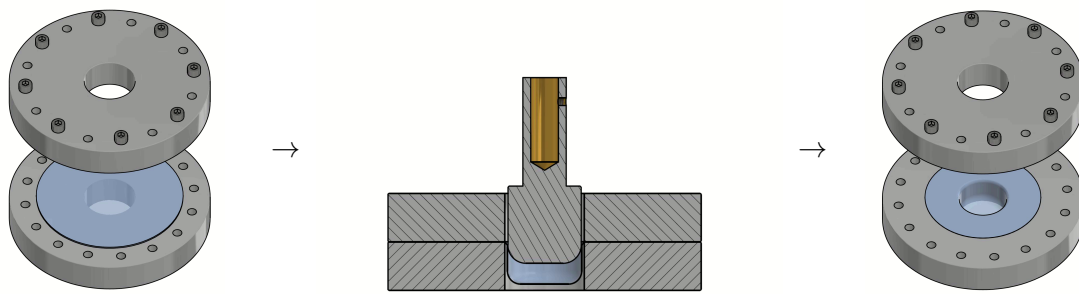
Schematics of the end cap molding process. The Mylar foil is placed in the mold and brought to the oven (left). The hot mold with the Mylar foil is pressed, molded and left to cool (center). After the mold cooled down, the final end cap is taken out of the mold (right).
